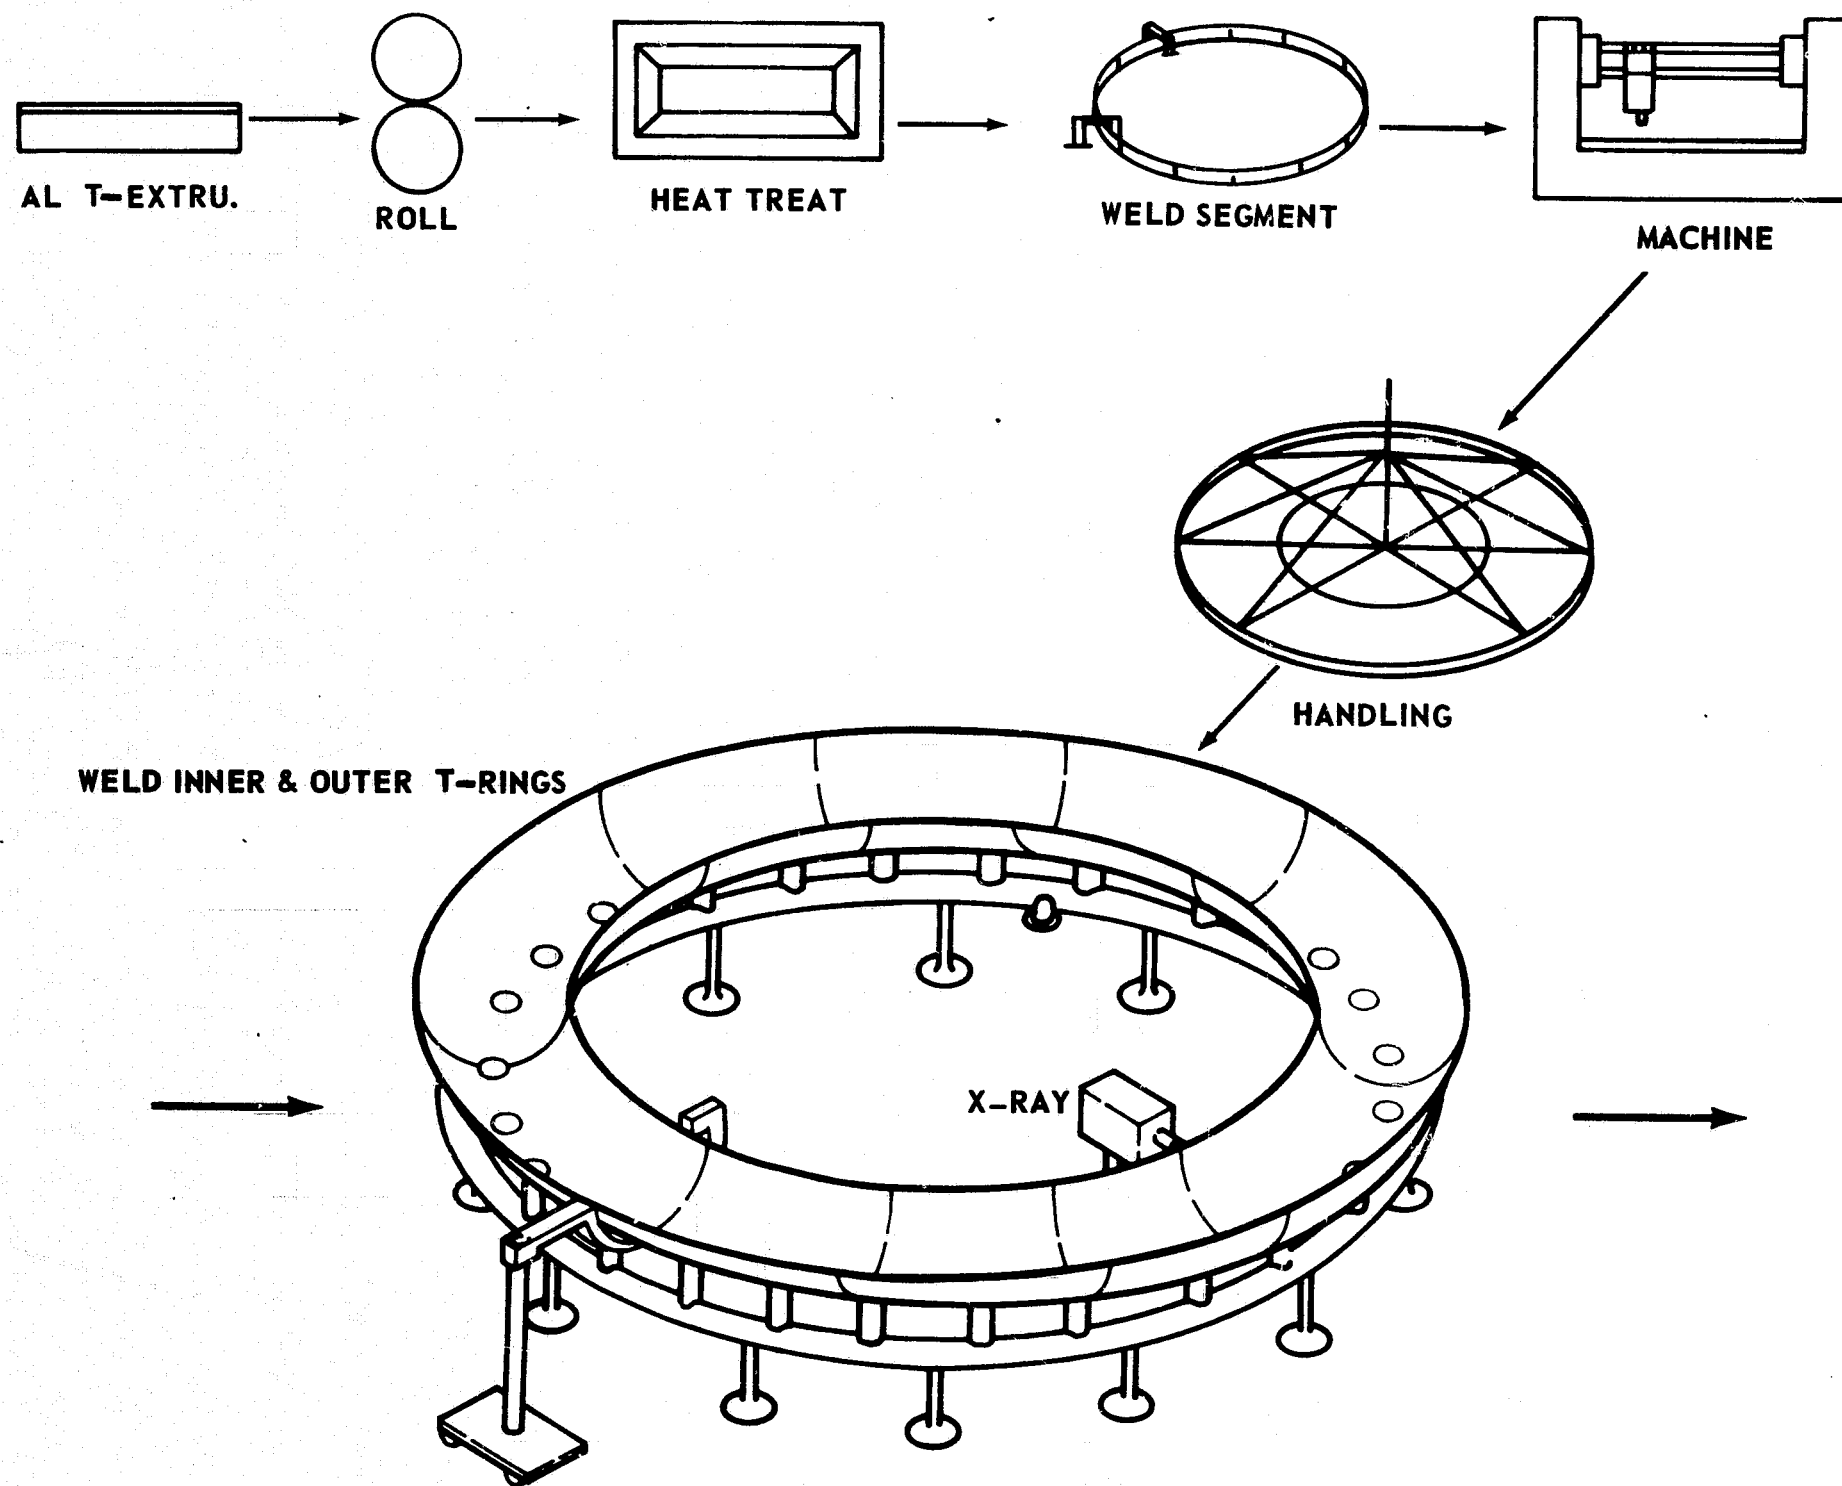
T-RING ASSEMBLY
